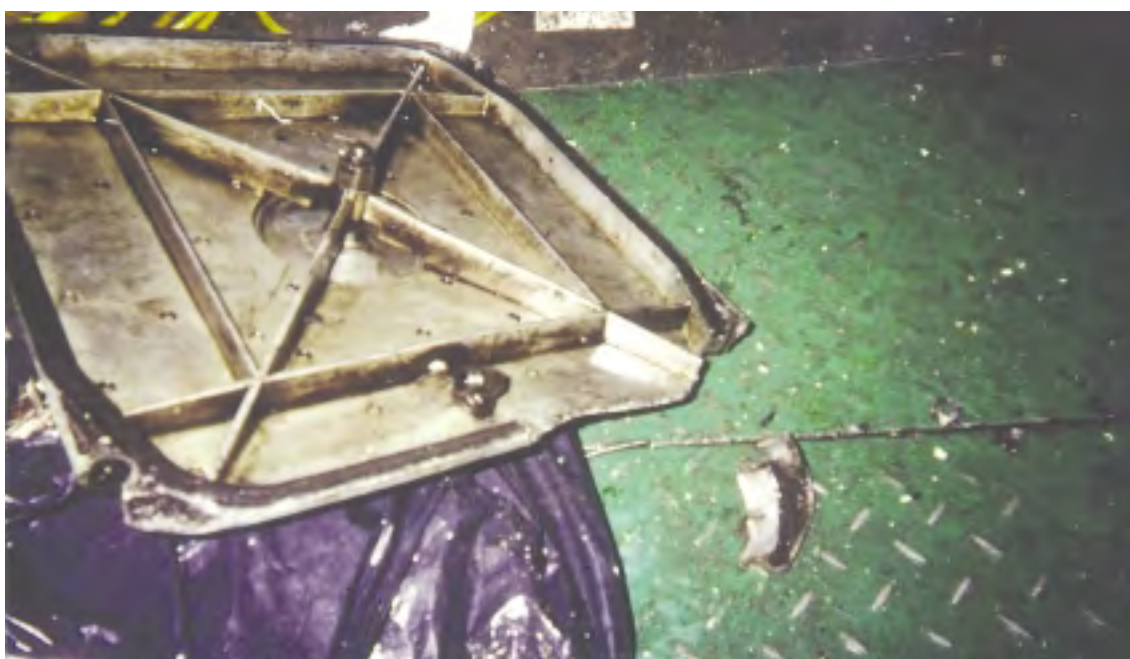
Number 7 crankcase explosion relief door showing damaged mounting points
